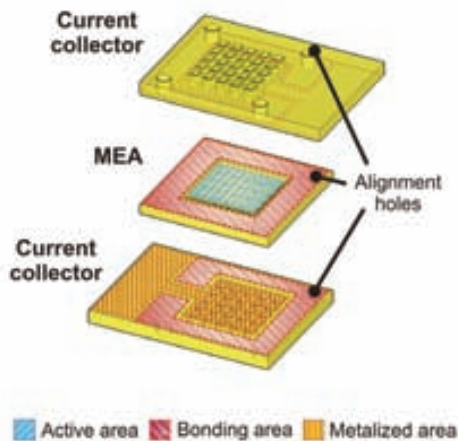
Exploded view of SU-8 micro fuel cell components and its main parts.
